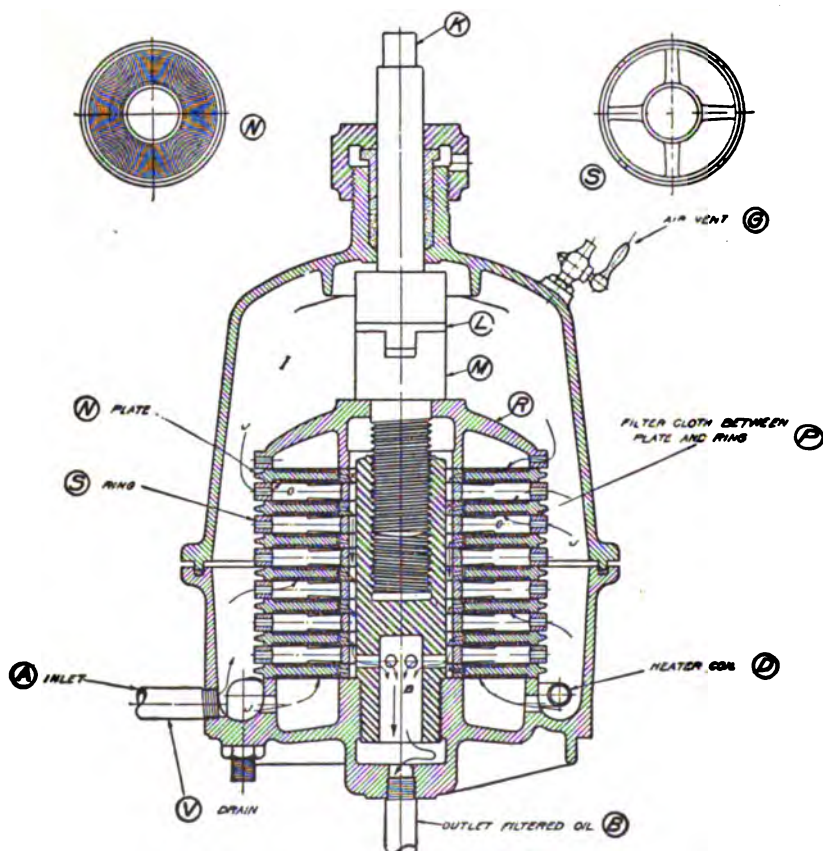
SEC. 8.—Pressure oil filter. Sectional view.
